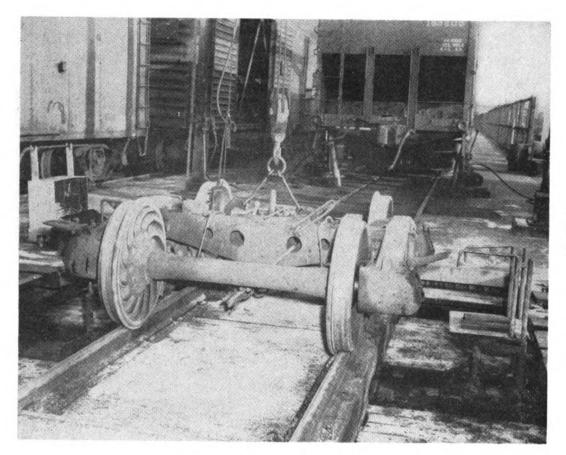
A dolly ready to be moved in to position for supporting the side frame on the right.
